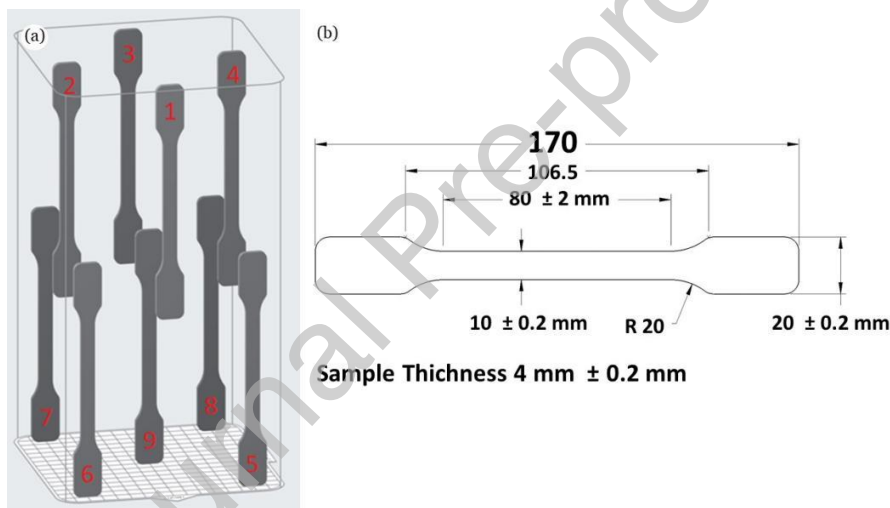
(a) Tensile specimens ISO 527-2 Type A1 position inside the SLS machine; (b) Dimensions for specimen ISO 527-2 Type A1 Standard [19].
